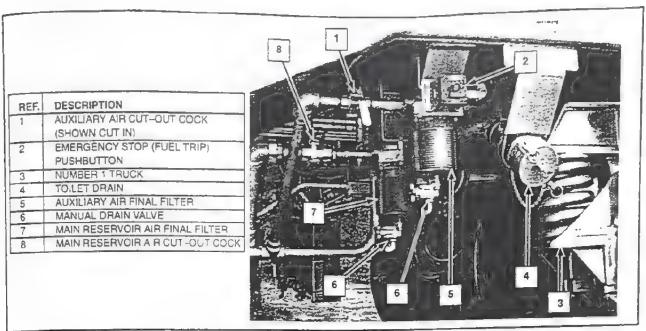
MAIN AND AUXILIARY AIR CUT-OUT COCKS AND FILTERS. E-41055A.
